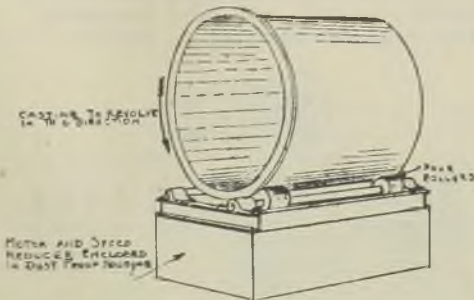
REVOLVING ARRANGEMENT FOR CLEANING CYLINDRICALLY-SHAPED CASTINGS.
